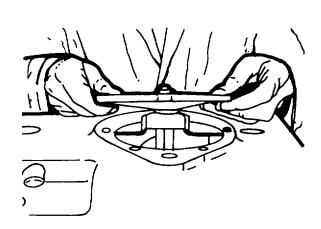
Installing Crankcase Cover (Engine Block Upside-down)
